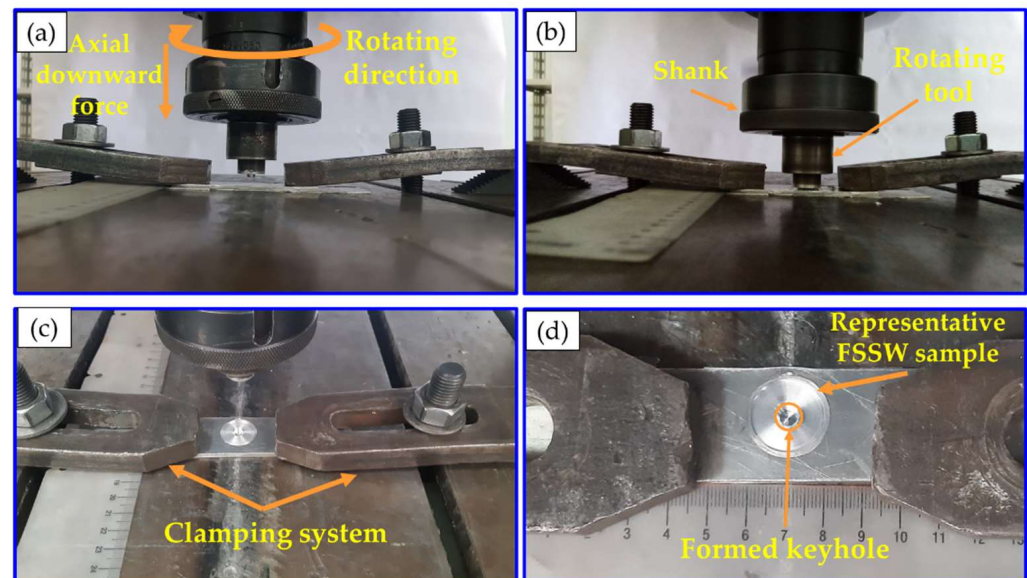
(a–c) summarizes the stages of the FSSW process of dissimilar sheet thickness AA6082-T welds. (d) shows the produced joint top view with the formed keyhole [36].
